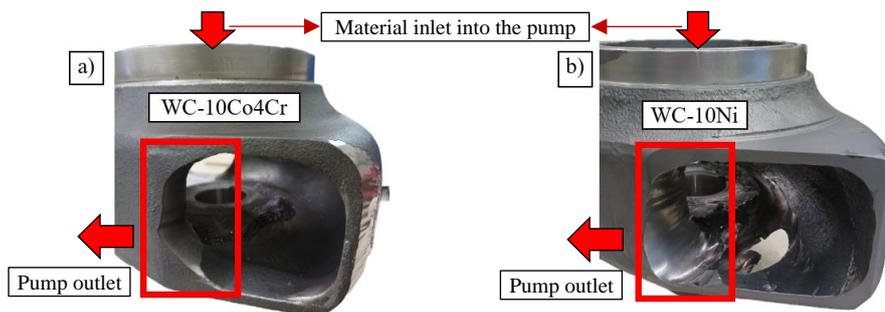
Wear on the inner outlet of coated rotors made of (a) WC-10Co-4Cr and (b) WC-10Ni.
